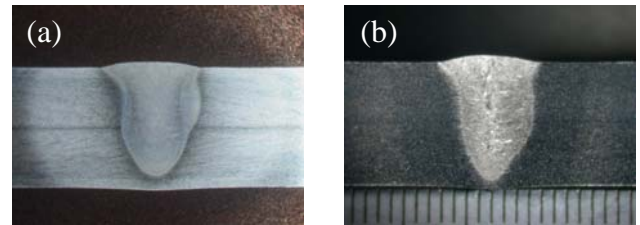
Comparison of weld shapes between (a)He-O₂ and (b)HeCO₂ as outer shield in double shielded TIG welding.
